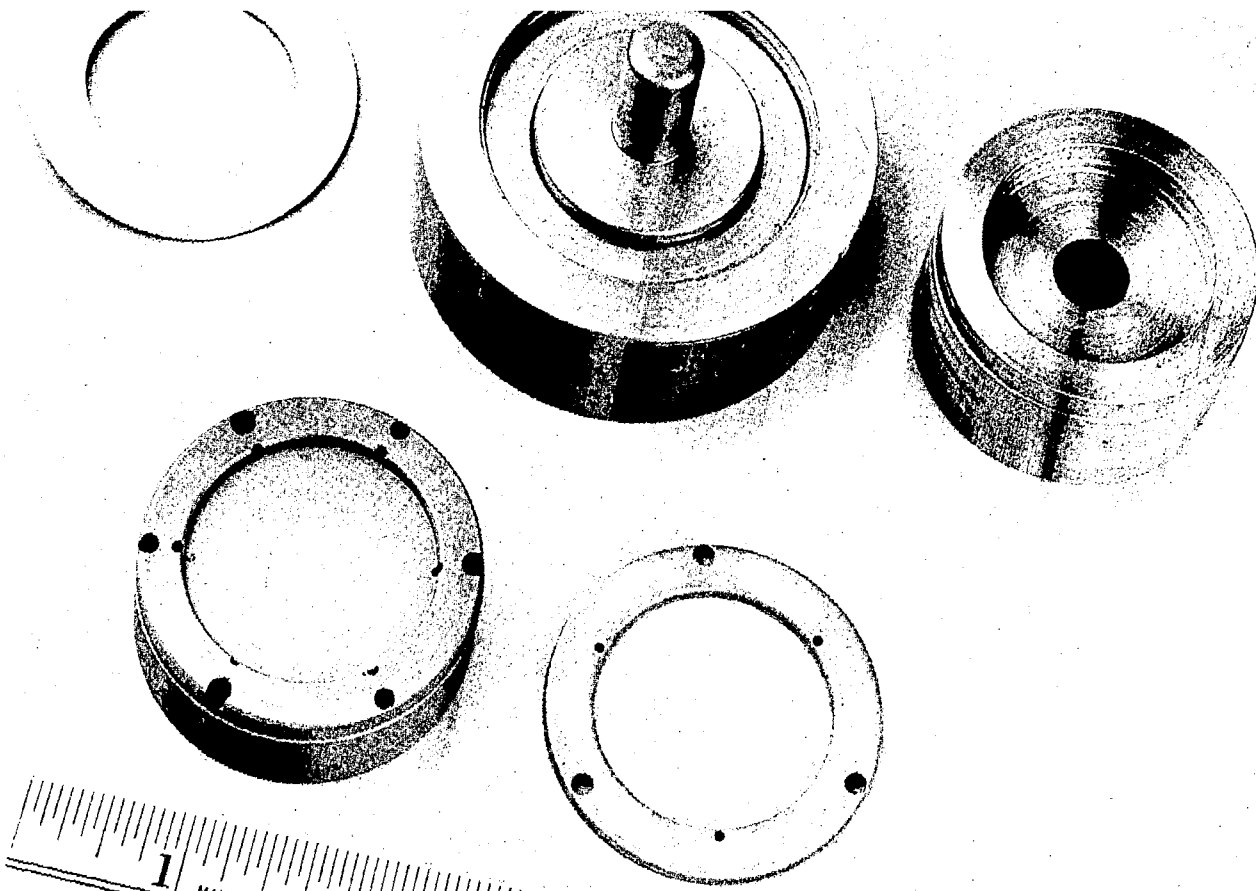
Stamping Die and Drill Jig Used to Fabricate Support Ring Units. Stainless Steel blanks (0.015 in. thick) are precut and stamped. Required holes are drilled using a simple jig (lower left). Finished support ring shown at lower right.
